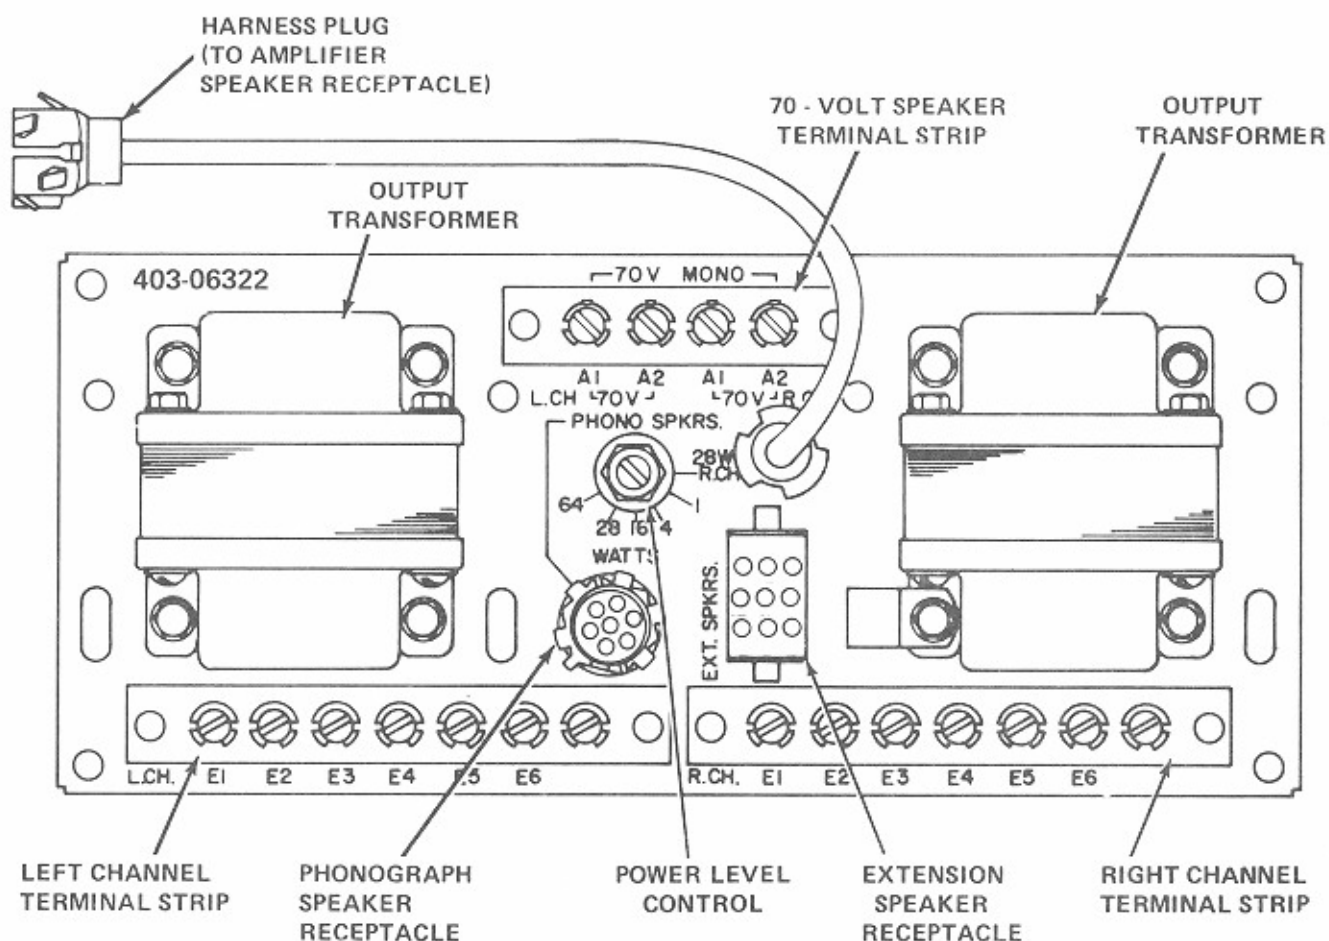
OUTPUT TRANSFORMER ACCESSORY PACKAGE
